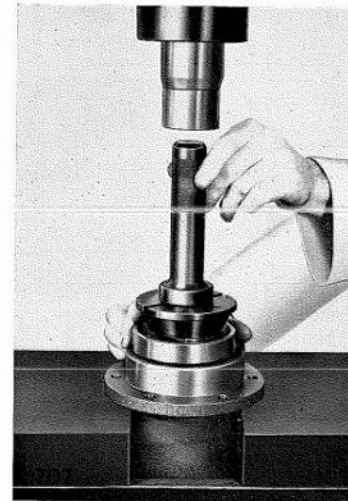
Pressing in the bevel pinion inner bearing cup, using the Churchill Tool R.G.315 in conjunction with the universal handle 550, applied in the normal position
